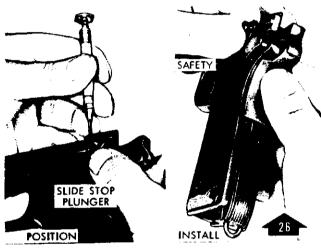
Disassembly/assembly of receiver group (1 Of 7).
